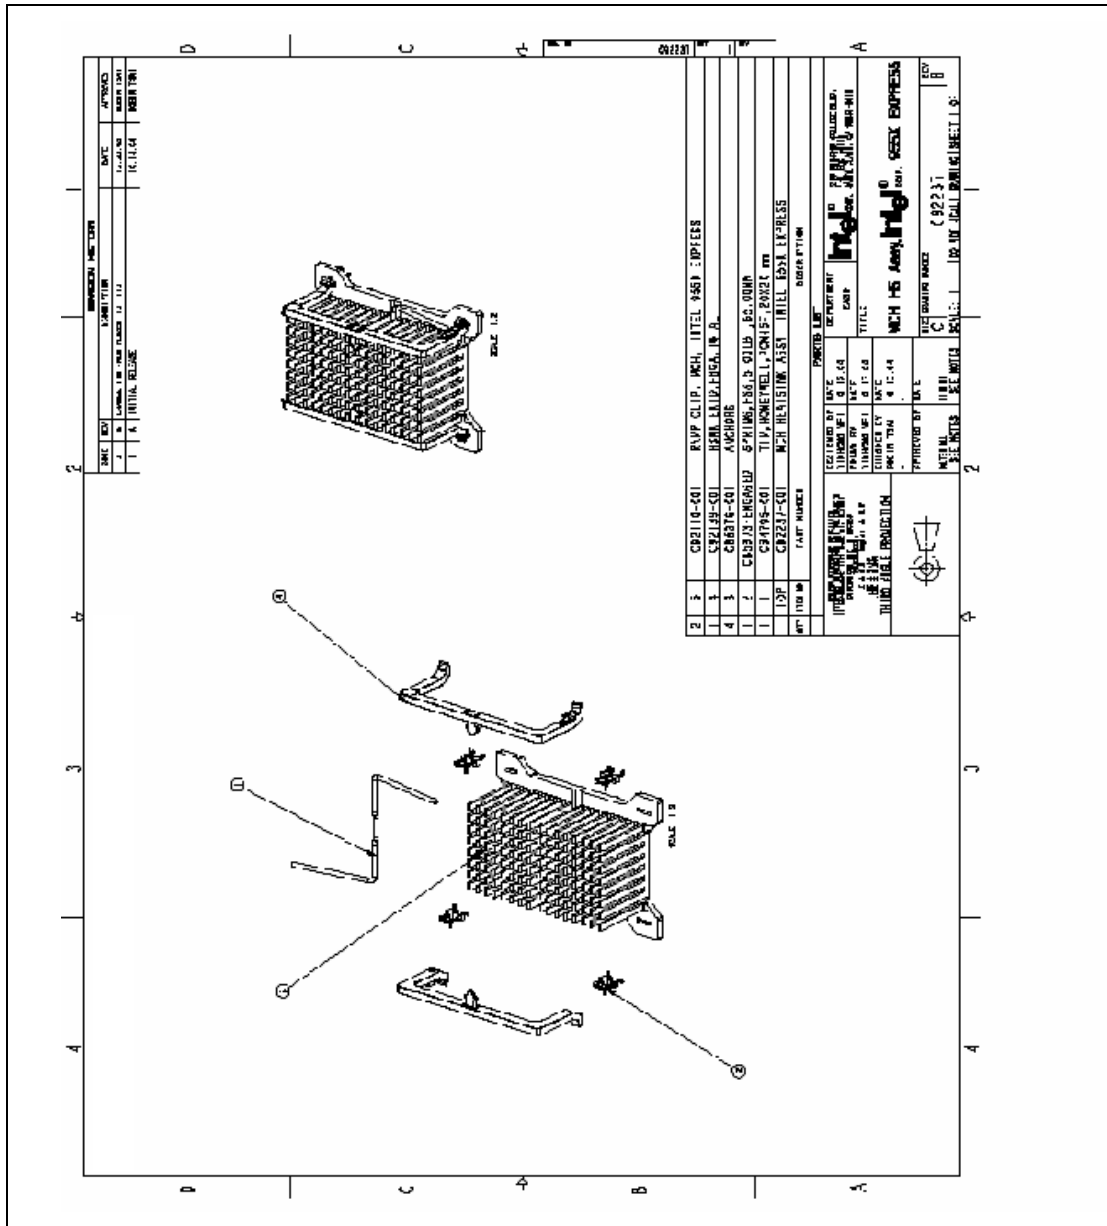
Plastic Wave Soldering Heatsink Drawing (2 of 2)
